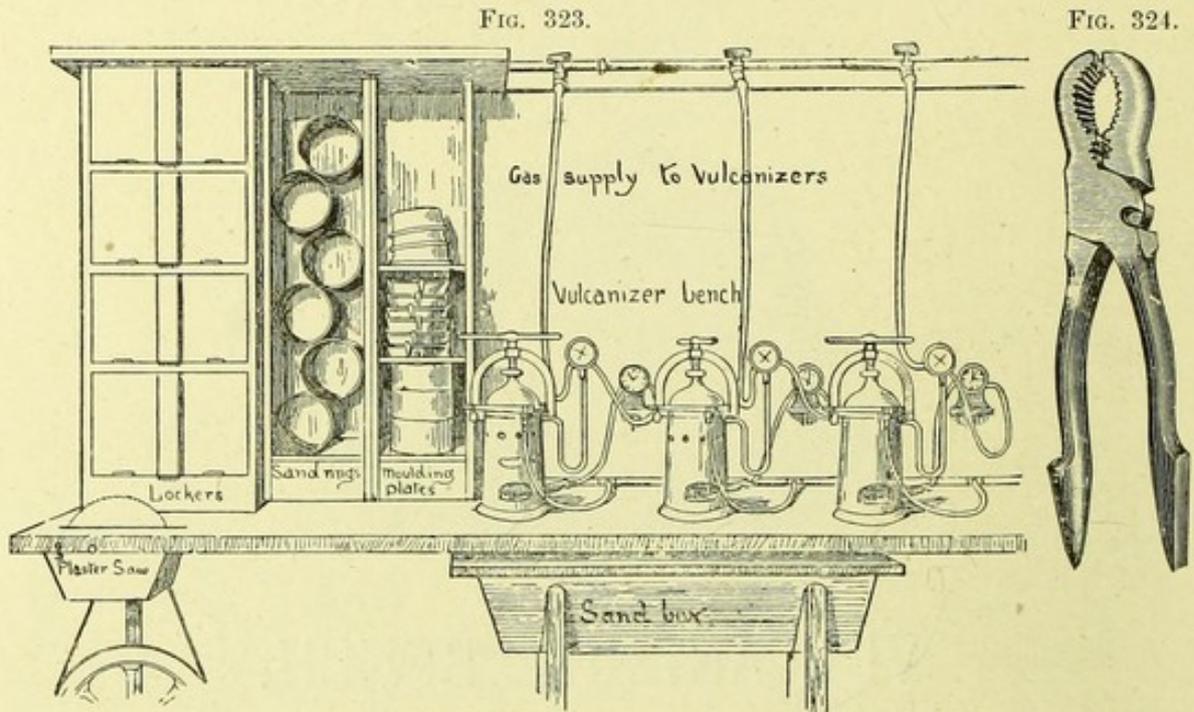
AUTHOR'S VULCANIZER BENCH, showing:—(a) Plaster Saw; (b) Lockers; (c) Sand Rings; (d) Moulding Plates; (e) Sand Box; (f) Gas Supply and Taps; also Vulcanizers, the Stands of which are screwed to Bench, and Compo Pipe leading to external air, connected with Screw Taps for blowing off steam from the Vulcanizer boilers.
